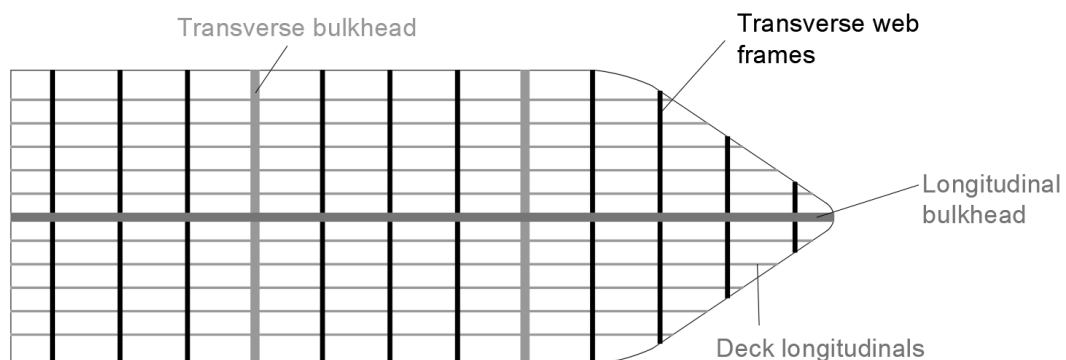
Vessel bulkheads, deck longitudinals and deck transverse frames schematic overview
